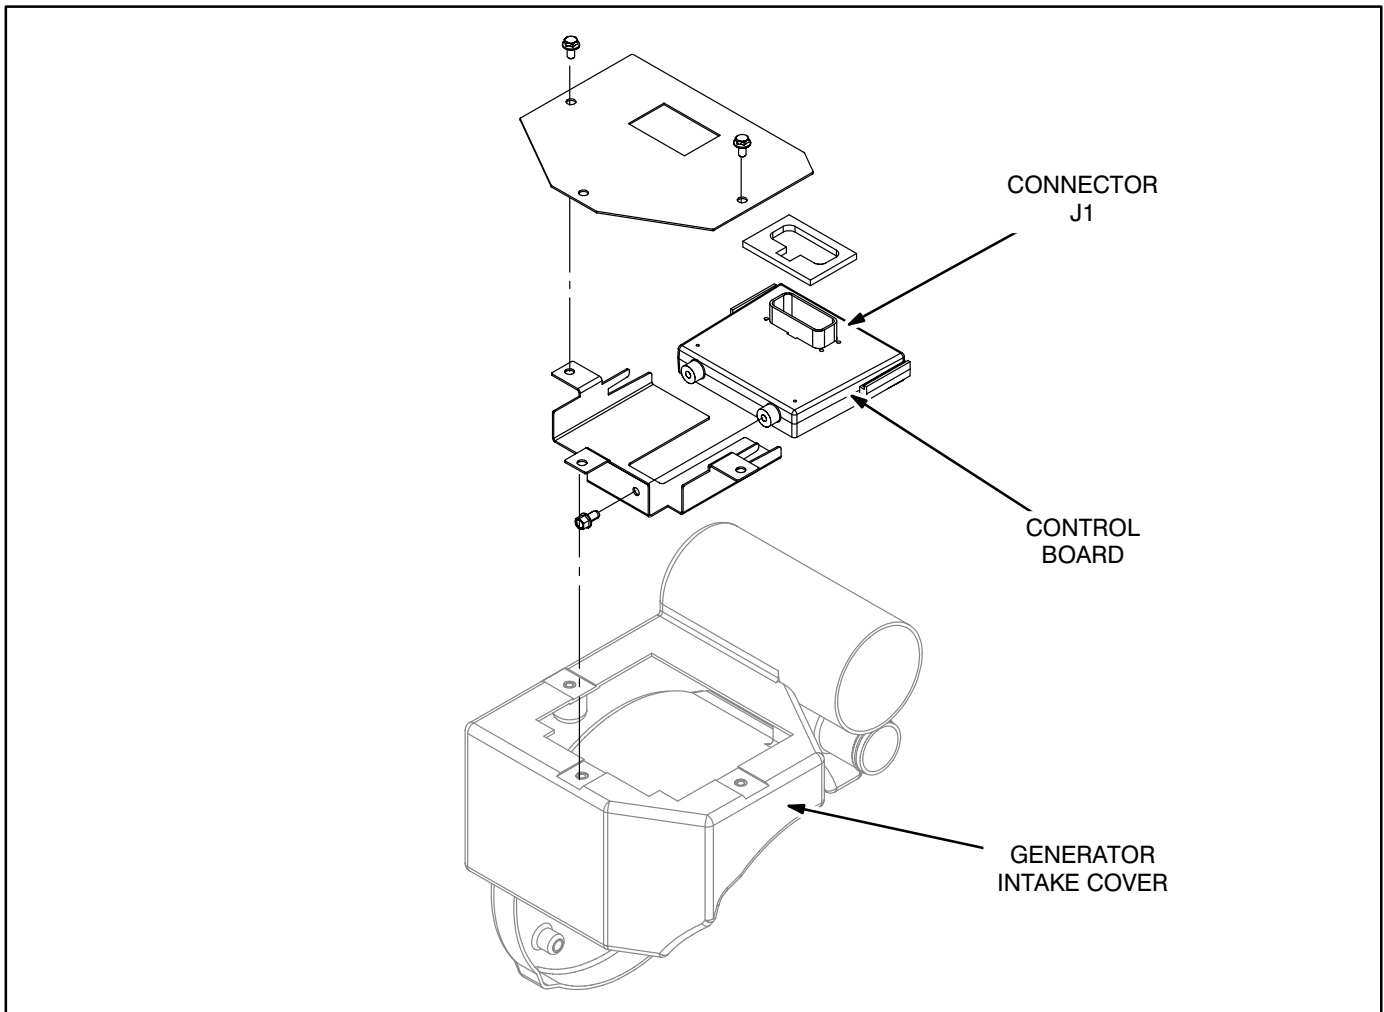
CONTROL BOARD (BEGINNING SPEC C)
